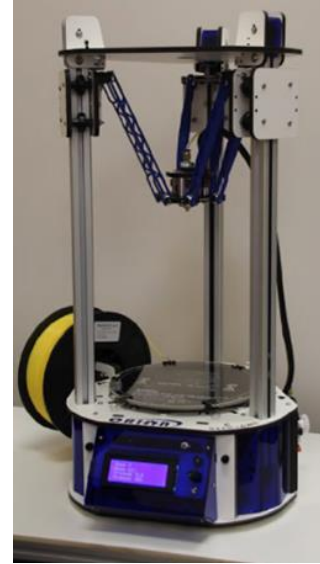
A deltabot 3D printer (the seeMeCNC Orion)
